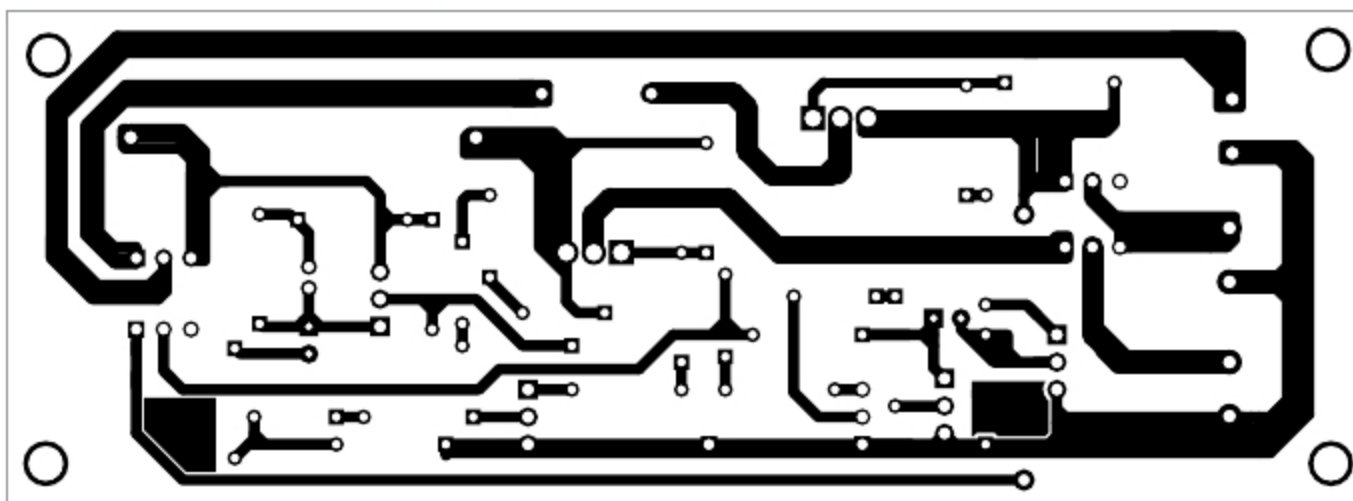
Actual-size PCB layout for solar day lamp with battery backup
